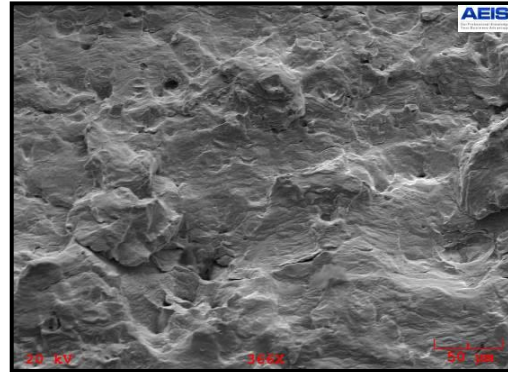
Fracture face of solder showing fatigue striations at 366 X Magnification
